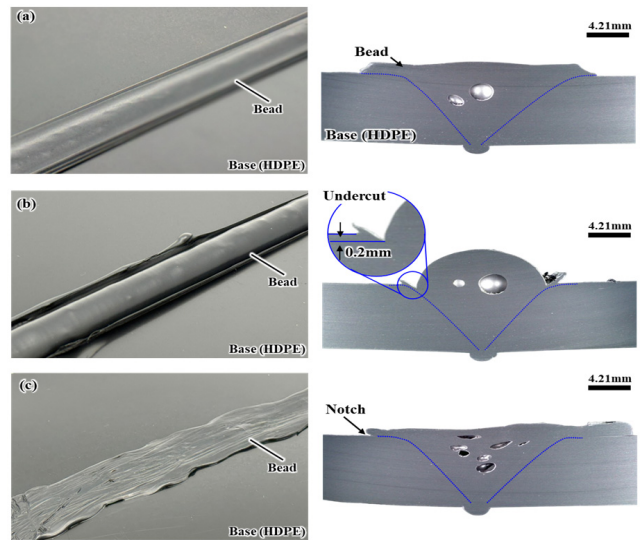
Bead surface and weld cross-section results: (a) butt shoe, (b) round shoe, and (c) round shoe with press tool
